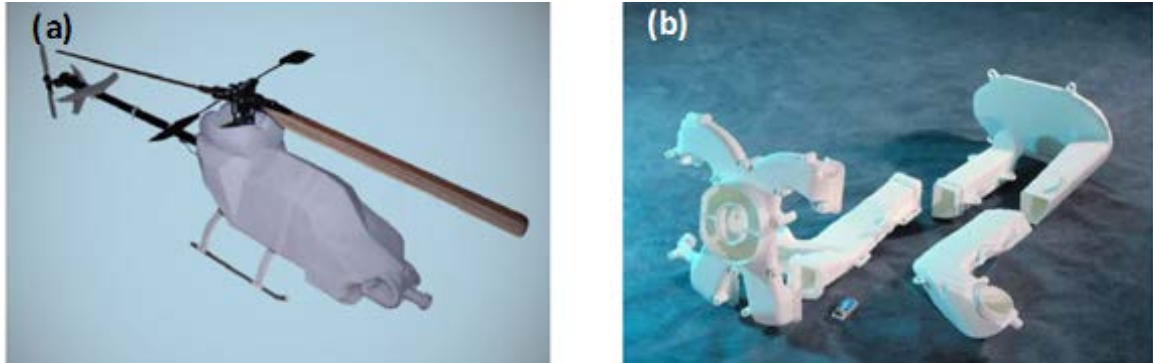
(a) Helicopter concept model; (b) Outlet gas “mock-up” part [36].
